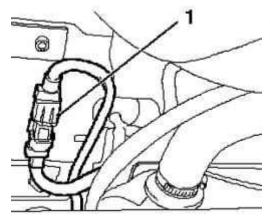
Wiring harness connector module in the tank: 1 - connector
